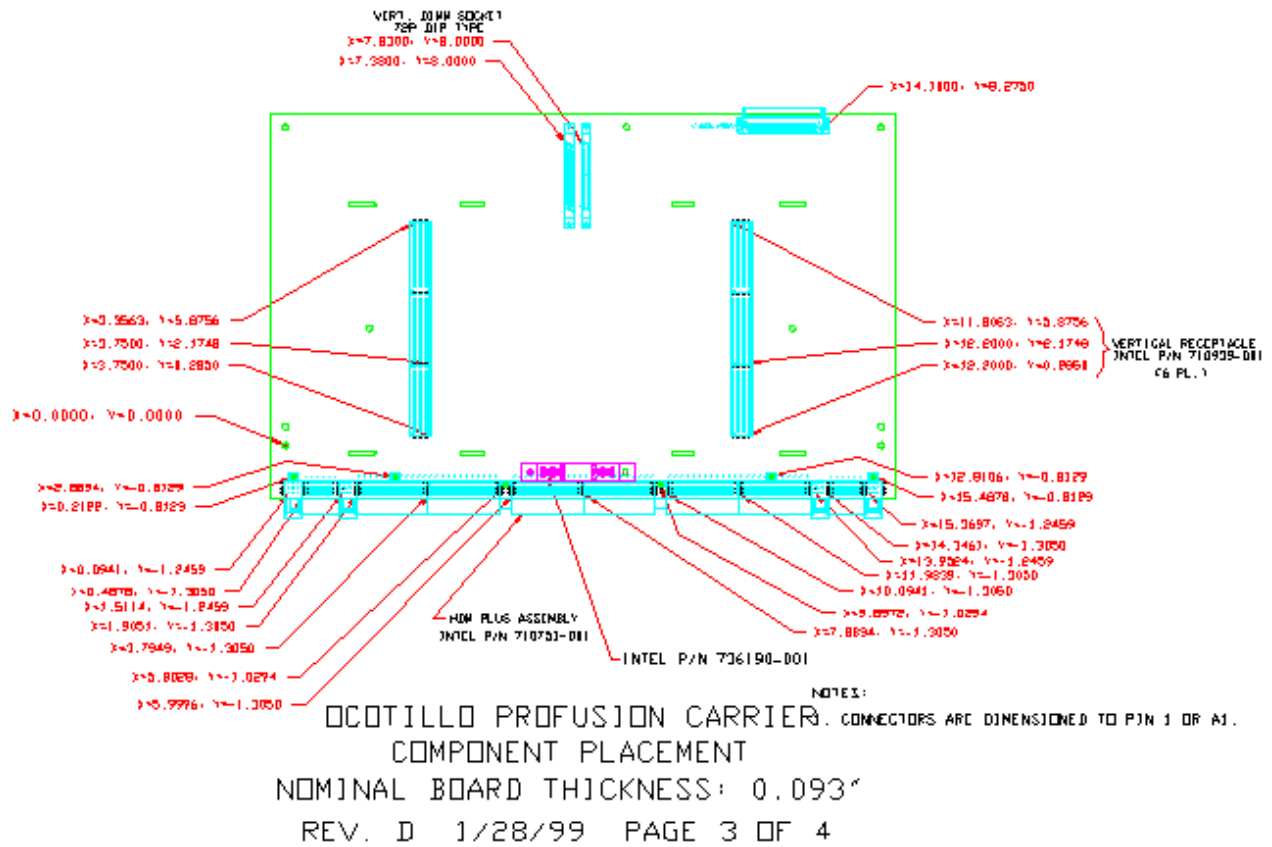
Profusion\* Carrier Mechanical Drawing
